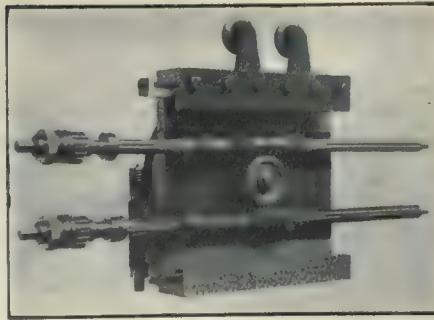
Rear View of Saddle for Swivel Head on New Model Mill.
